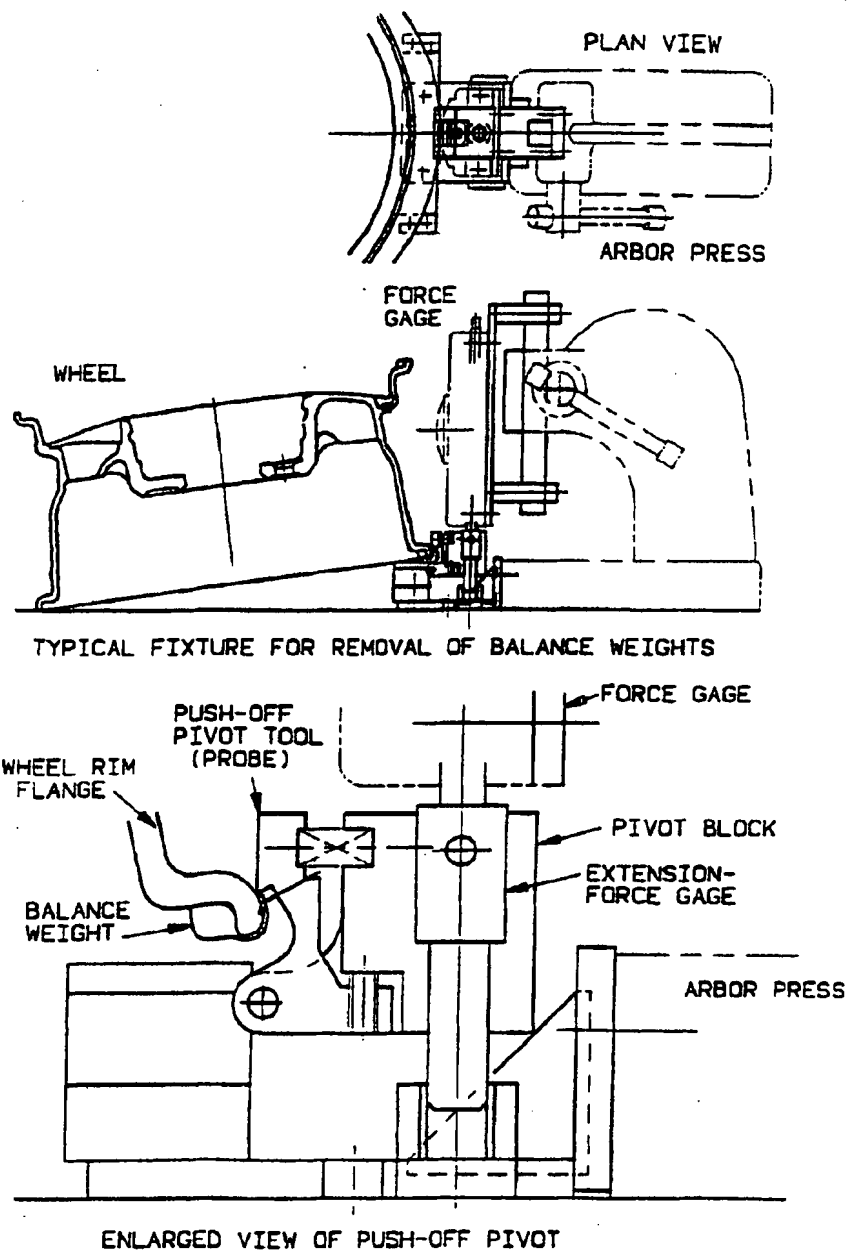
TYPICAL FIXTURE FOR REMOVAL OF BALANCE WEIGHTS AND ENLARGED VIEW OF PUSH-OFF PIVOT
